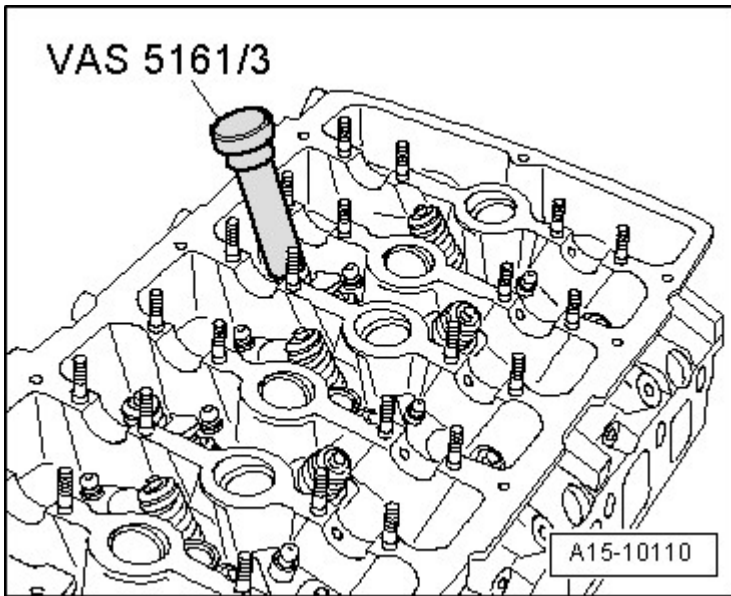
Placing Drift VAS 5161/3 On Valve Plate
